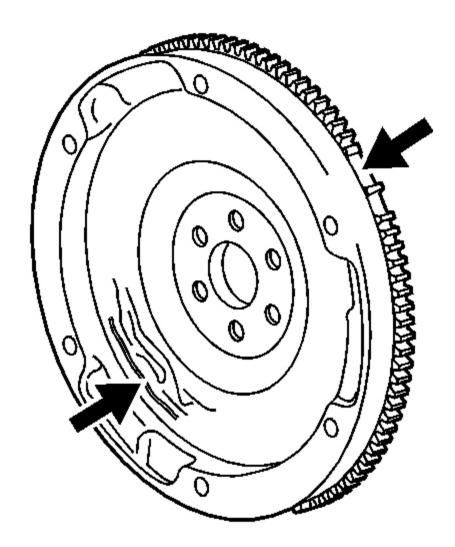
Inspecting The Flywheel Ring Gear For Damage Courtesy of GENERAL MOTORS CORP.
